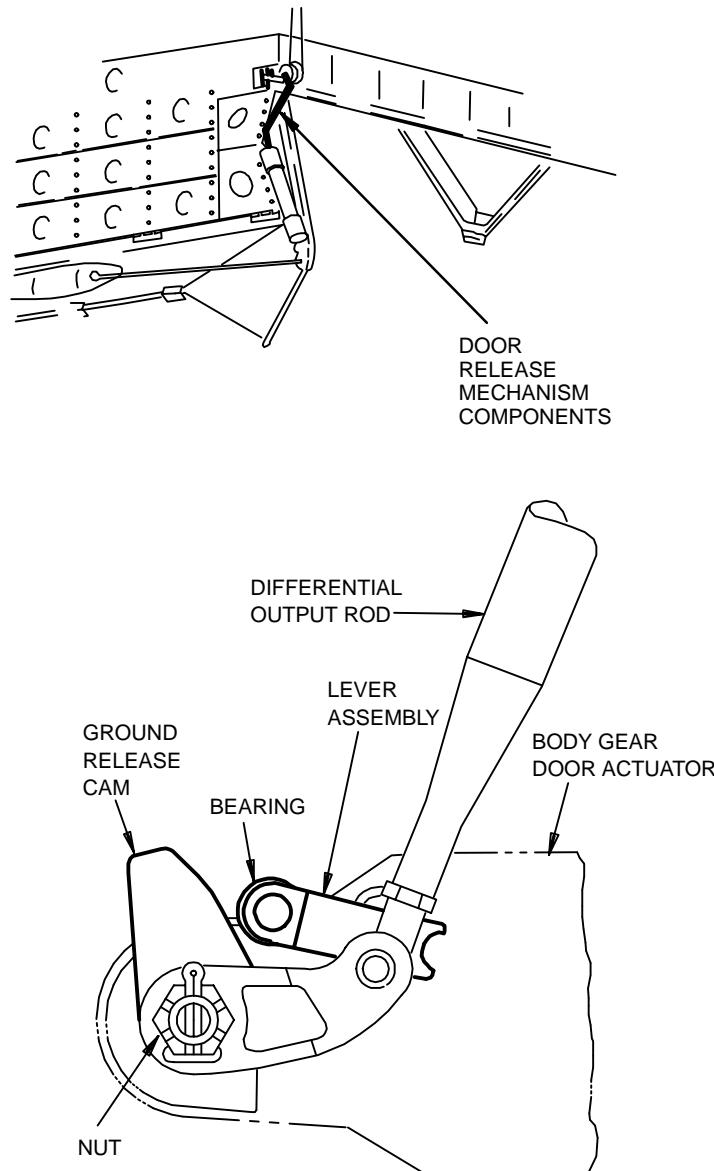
BODY GEAR DOOR RELEASE COMPONENTS
